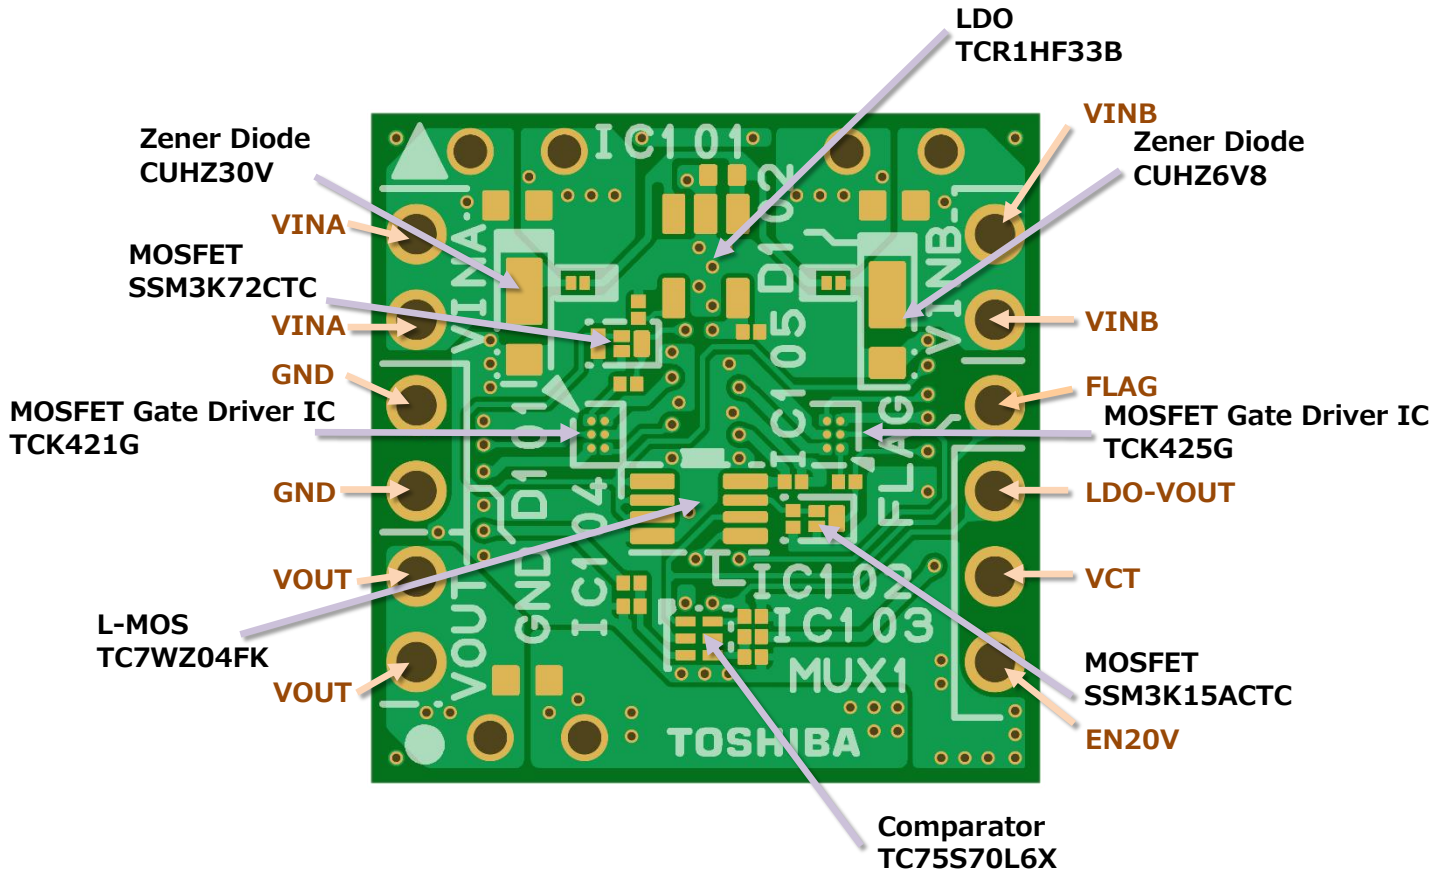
Module Board Main Component Layout (Front Side – Example MUX1)
